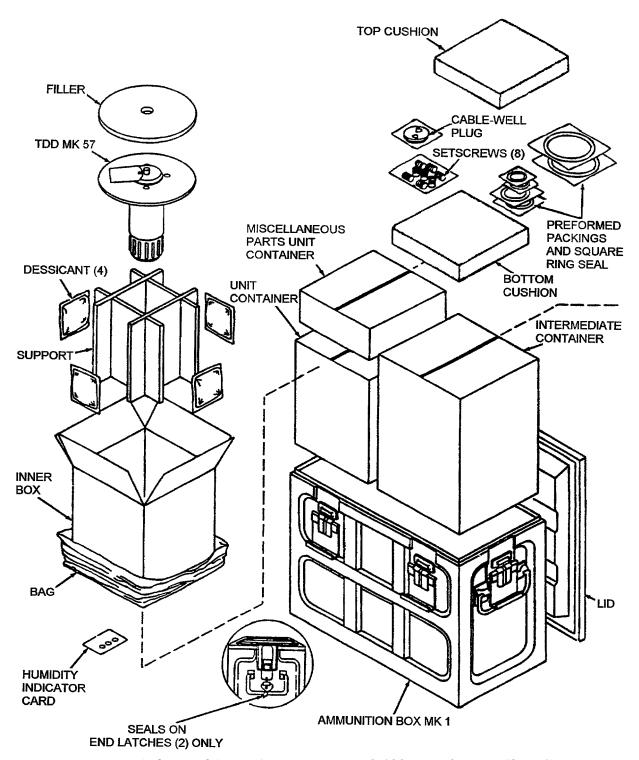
Bomb/Mine Conversion Kit Mk 130 Repackaging (Sheet 1)
